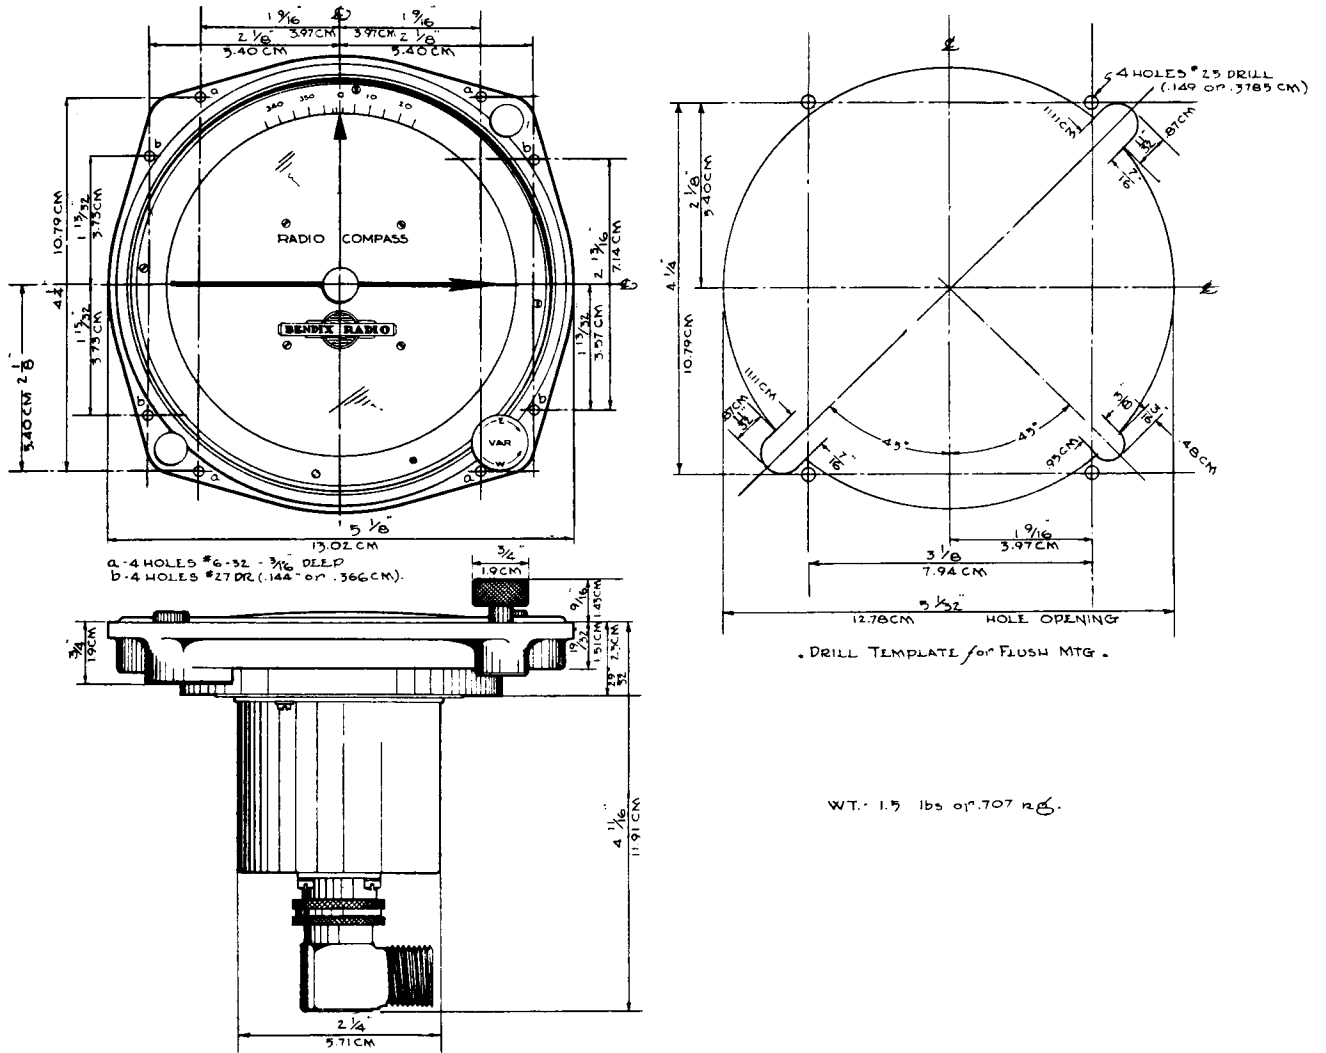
TYPE MN-37A BEARING INDICATOR, OUTLINE & MTG. DIMENSIONS
